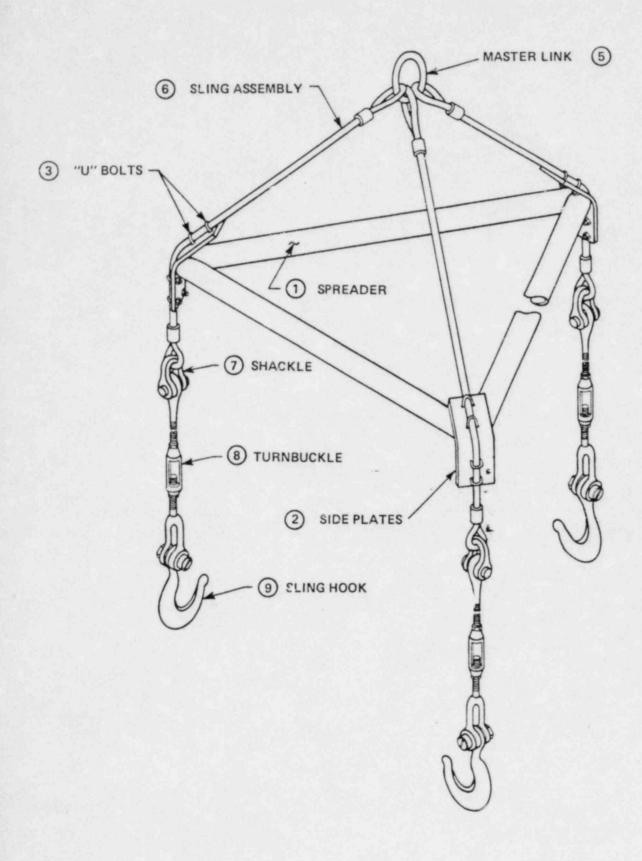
Reactor Coolant Pump Motor Lift Sling
